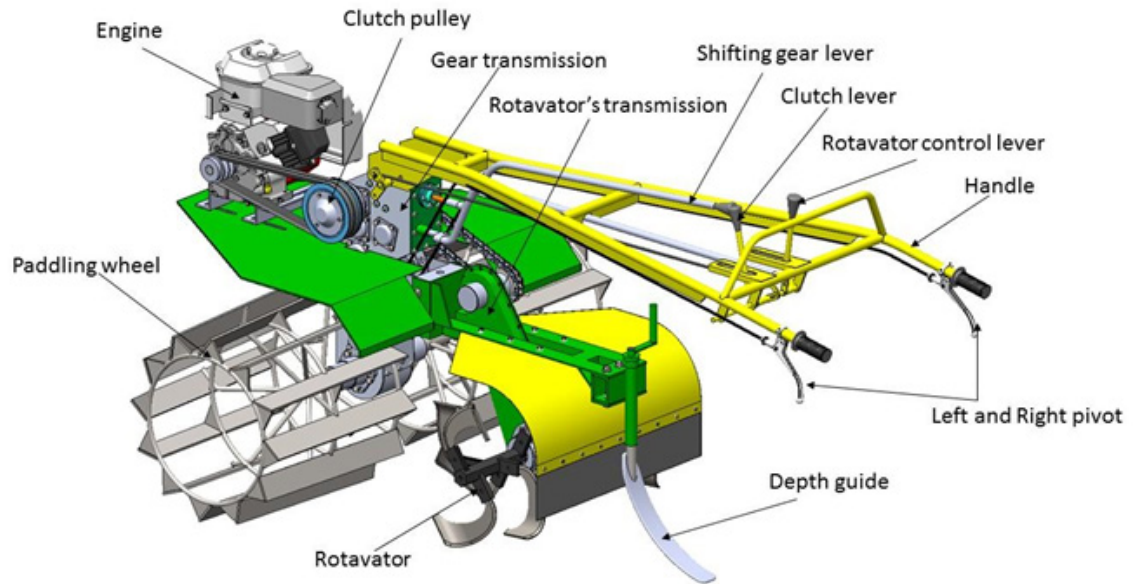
Updated CAD drawing of the prototype with rotavator attachment
